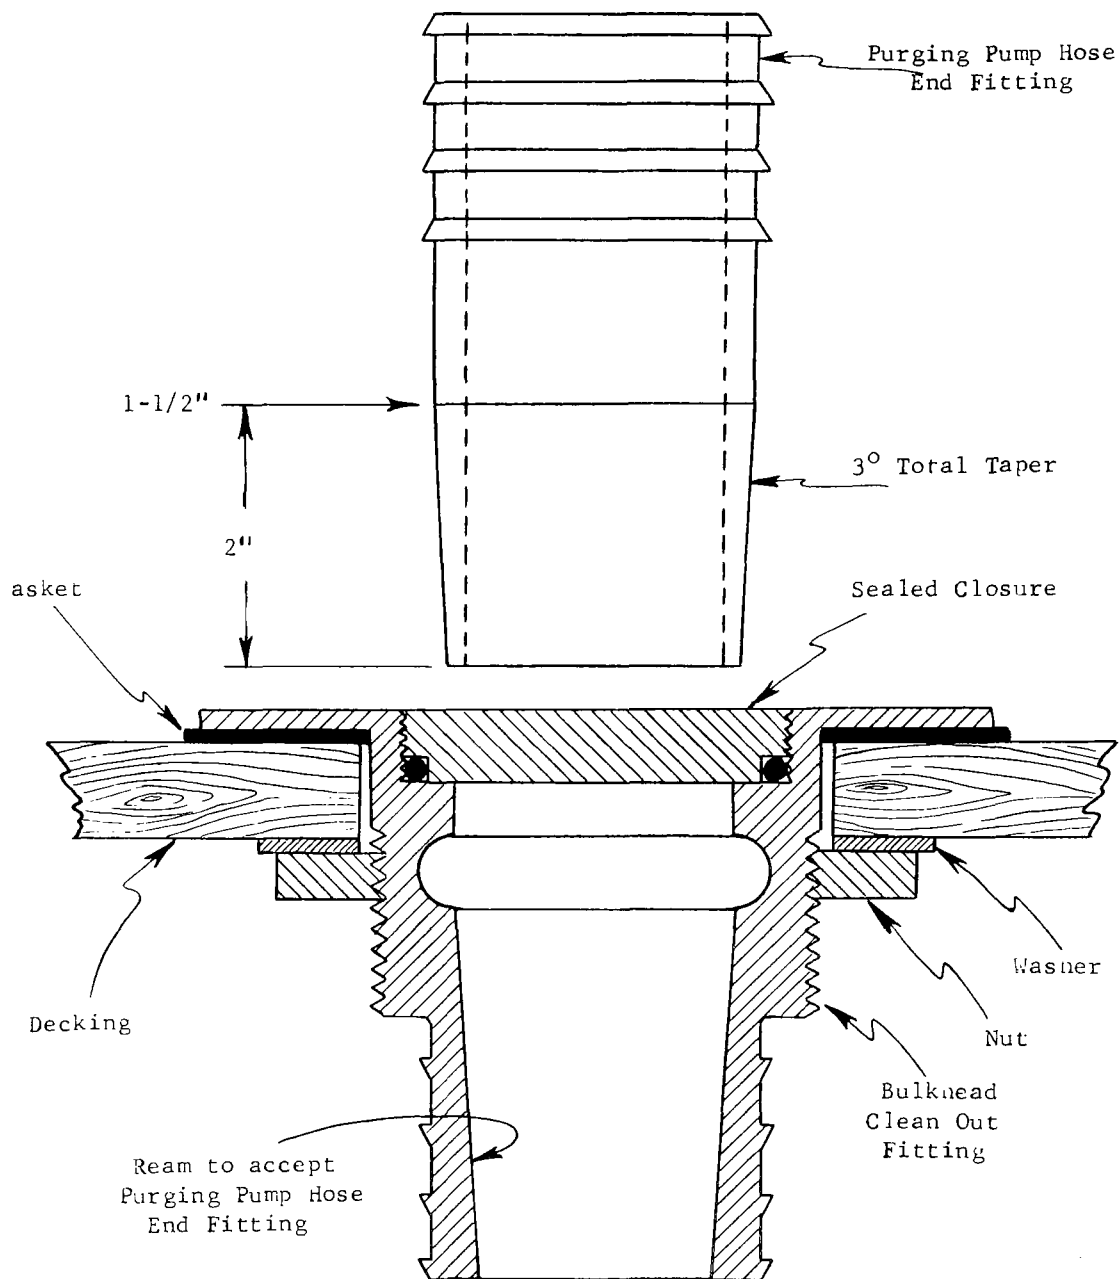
Bulkhead Clean Out Fitting and Purging Pump Hose End Fitting
